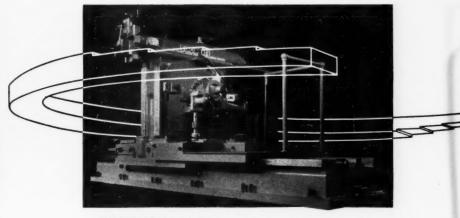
1,000-ton press in which ellipsoidal column heads are formed.
